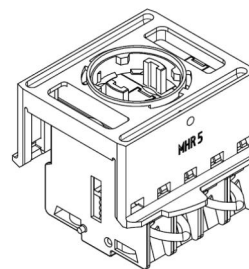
Assembly of MTZU + MTZU_564 to the module holder MHR_5
